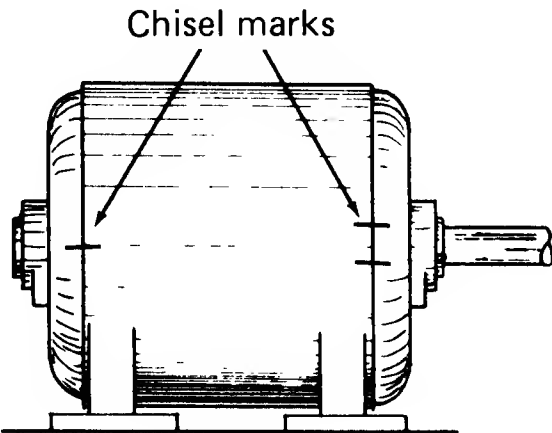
A motor showing end plates not mounted properly. This prevents the rotor from turning. Use a mallet to tap plates into position.
